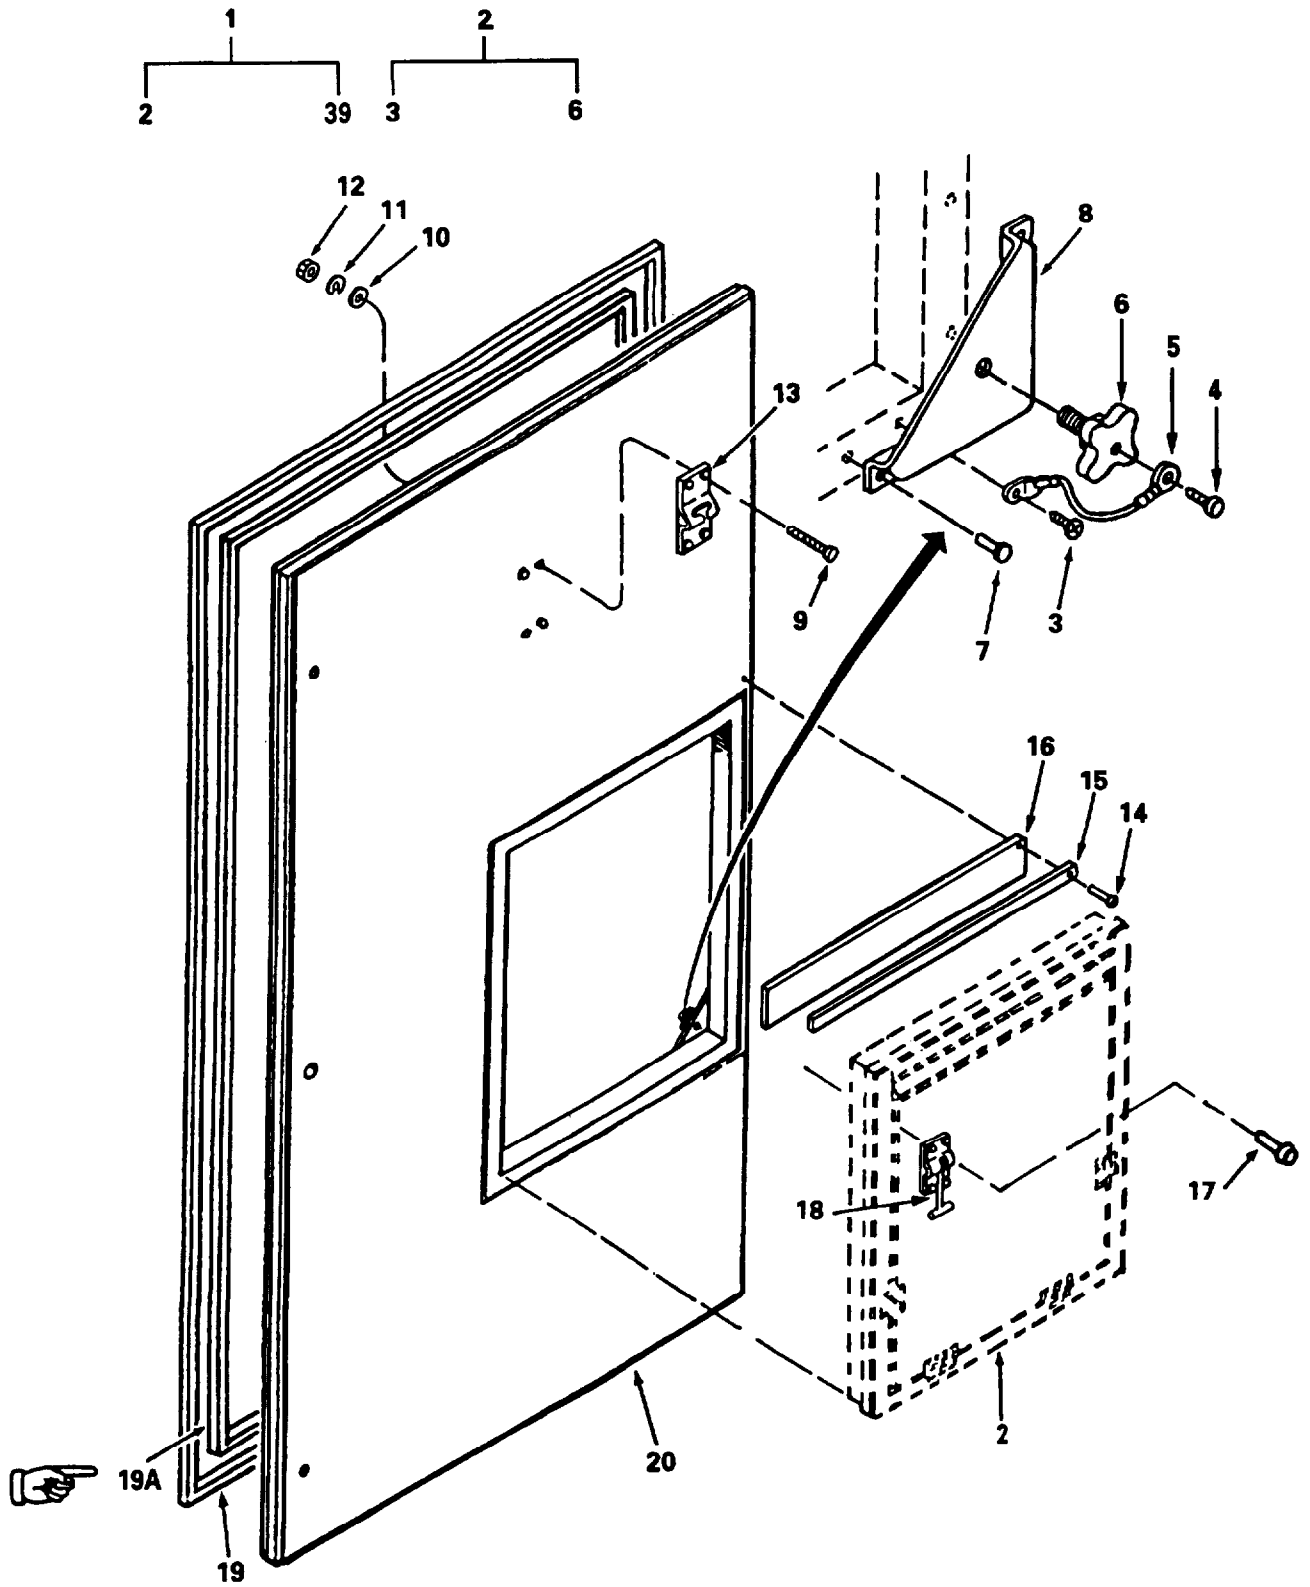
Door Assembly and Emergency Exit Panel (Sheet 1 of 2)
